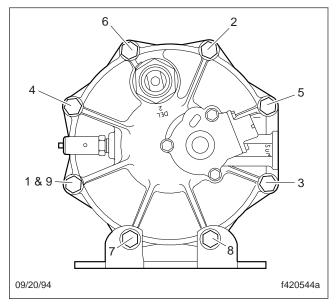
, AD-9 End Cover to Housing Torque Pattern
